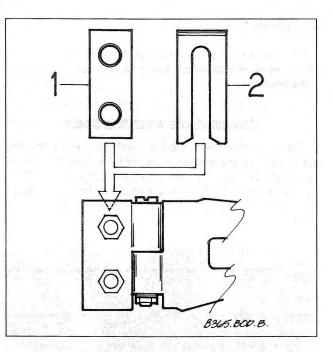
Door hinge showing location of shims between hinge and door. Initial adjustment made with shim style 1. Fine adjustment made with shim style 2 (available in 1.0 mm or 0.5 mm thickness).
